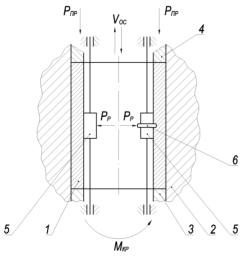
The inner surface hardening method of bush type parts by roller running [9]: 1 - part; 2 - container; 3 - hold-down tool; 4 - abut; 5 - rollers; 6 - deformation rib.
